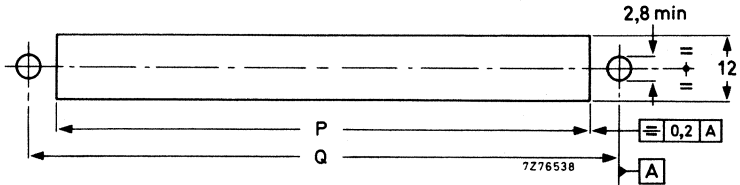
Panel cut-out for the male part; see Table 4 for dimensions P and Q.
